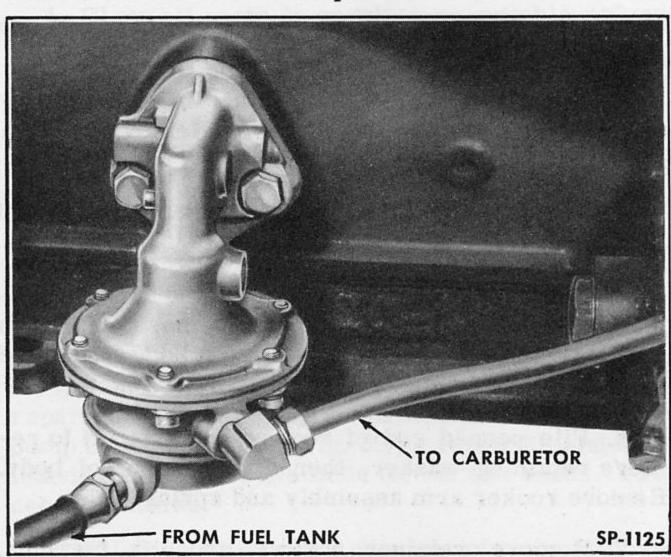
Fuel Pump Mounting (6 Cylinder Shown)
